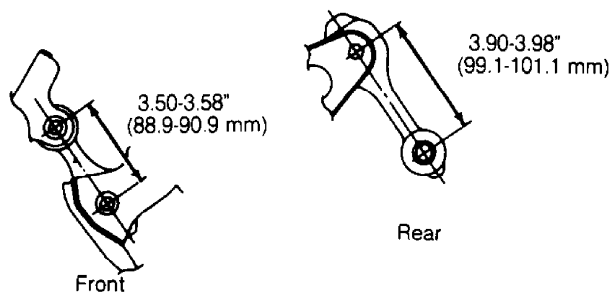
Adjusting Length of Buffer Rods (Maxima)
